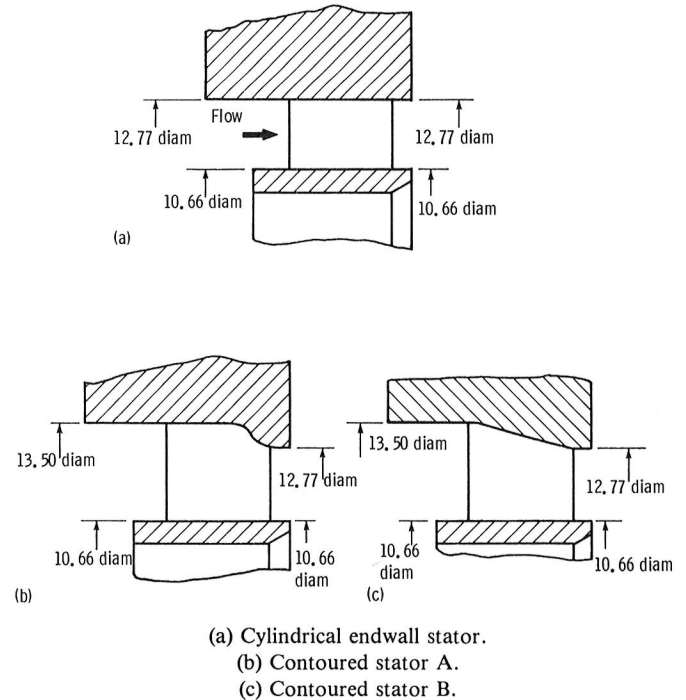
Schematic cross-sectional view of three stator configurations tested (dimensions in centimeters).
